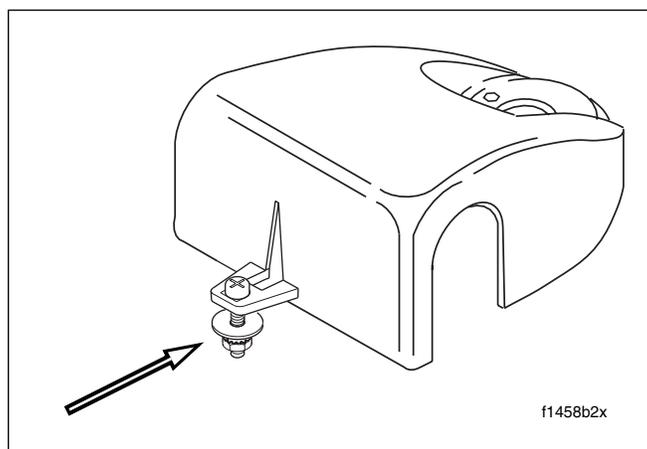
Handlebar Clamp Shroud and Screw Assembly
